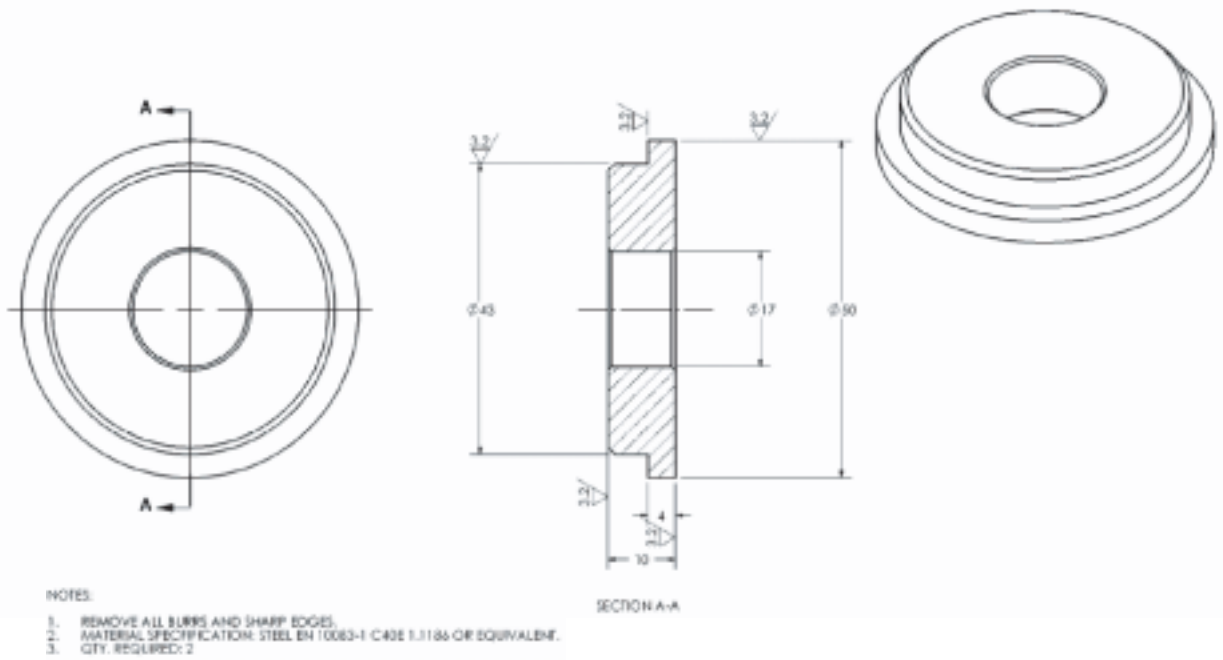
LWB Bush Insertion Tool 1(Section 180-0020, SUSPENSION SYSTEM- FRONT SUSPENSION)
